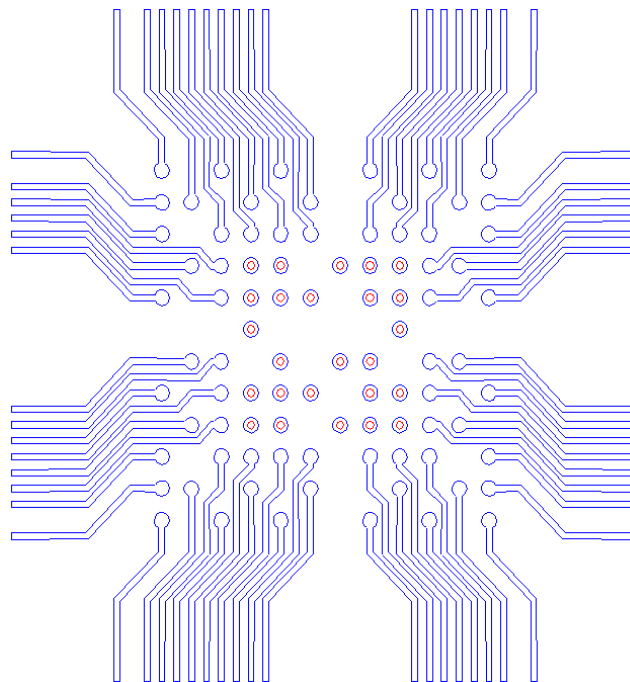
• Suggested Board Layout of Soldered Pads for CS281 CSPs (PCB Lower Layer)
